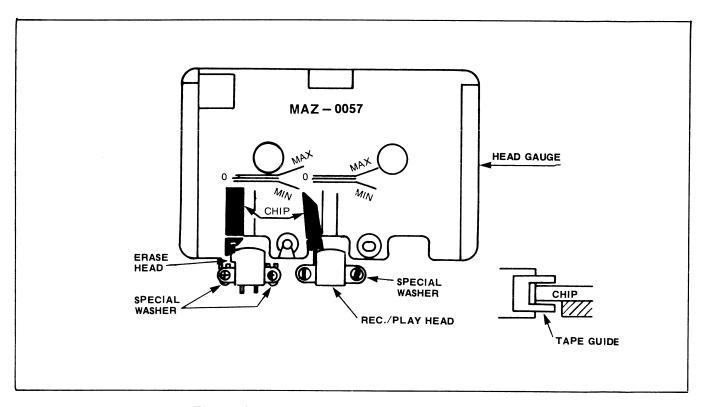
Figure AW. Head Height Adjustment for the Play/Record Head and Erase Head
